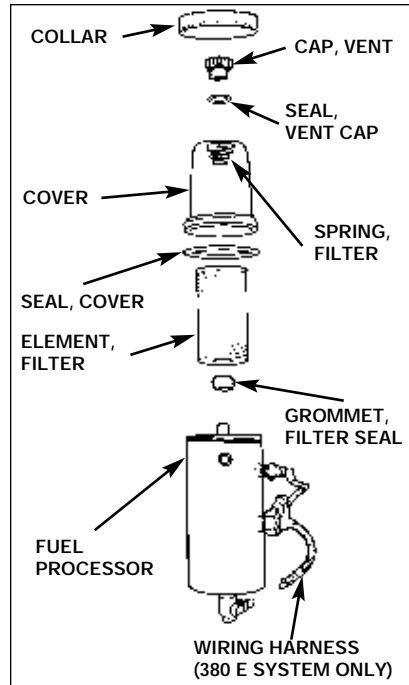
Fuel Pro 380E Fuel Processor Assembly
